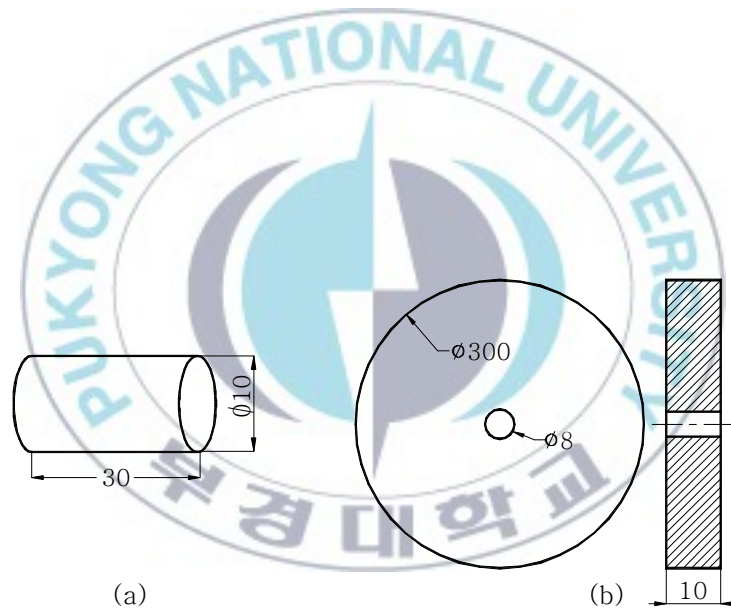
Dimension of specimens - (a) pin-sample; (b) brass disc
